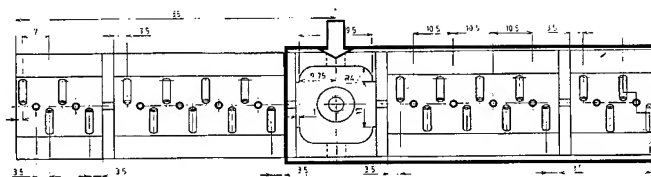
CAD drawing of tube 2 (registered, see [6]), top view
